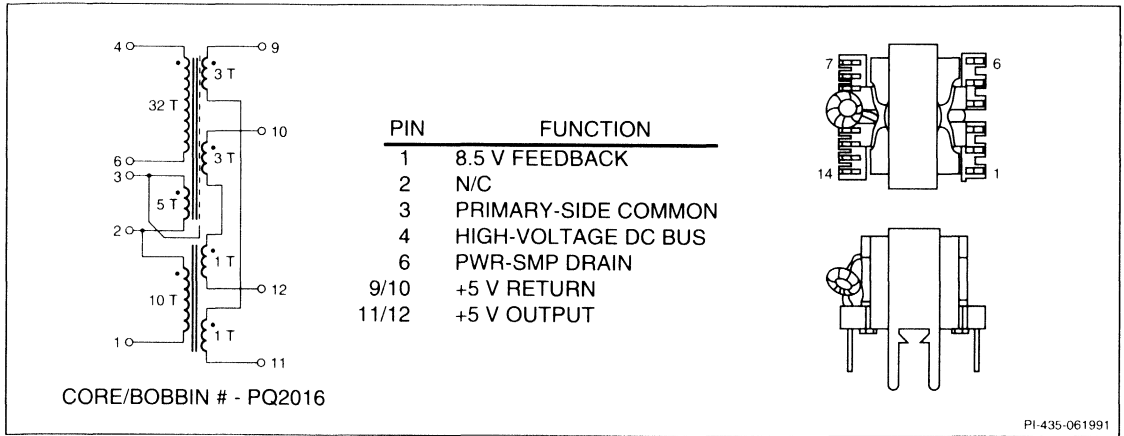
T1002 Transformer Pinout and Physical Dimensions¹.
